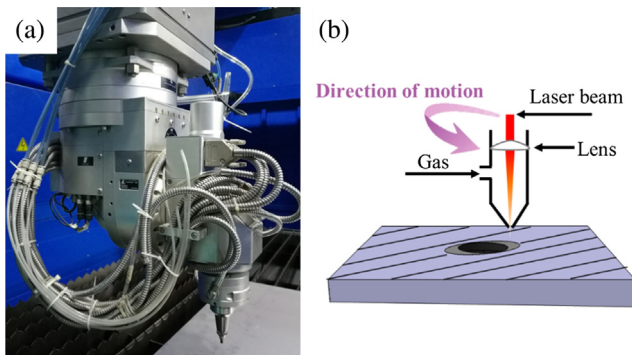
(a). Laser cutting head and (b) schematic of thermal damage during laser cutting of CFRP laminate.
